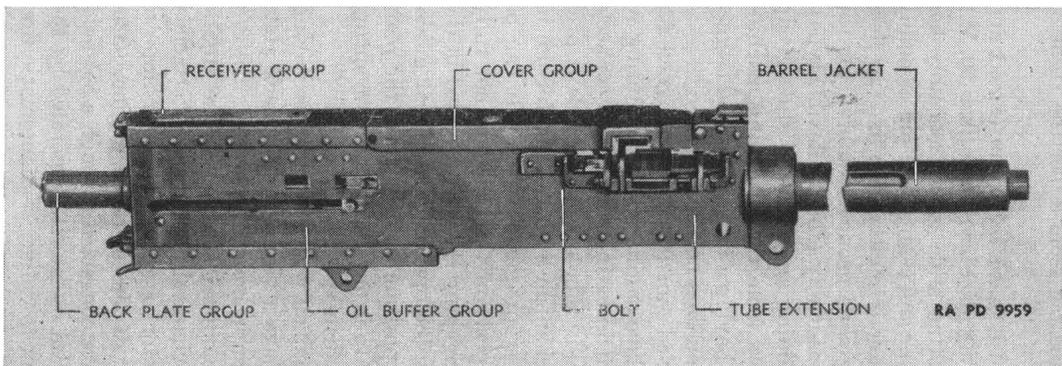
Browning machine gun, caliber .50, M2, aircraft, basic—location of major subassemblies.
